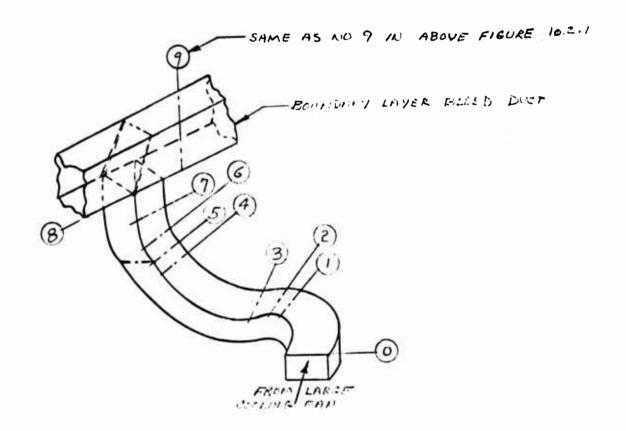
Cooling Air Duct Definition - Large Cooling
